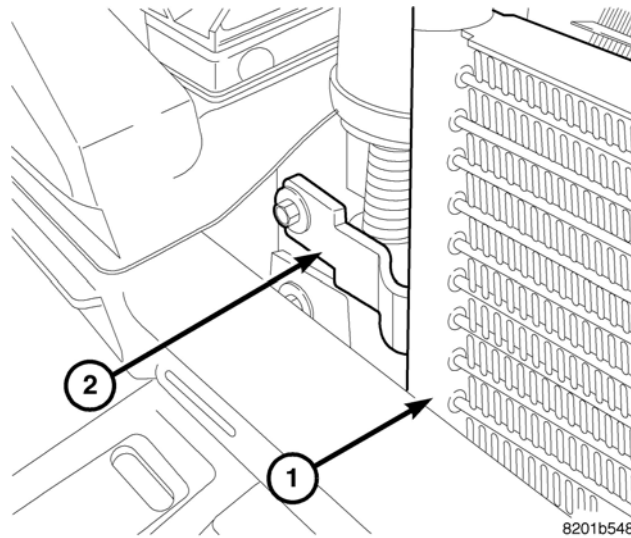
TRANSMISSION COOLER INSTALLED - RIGHT SIDE
